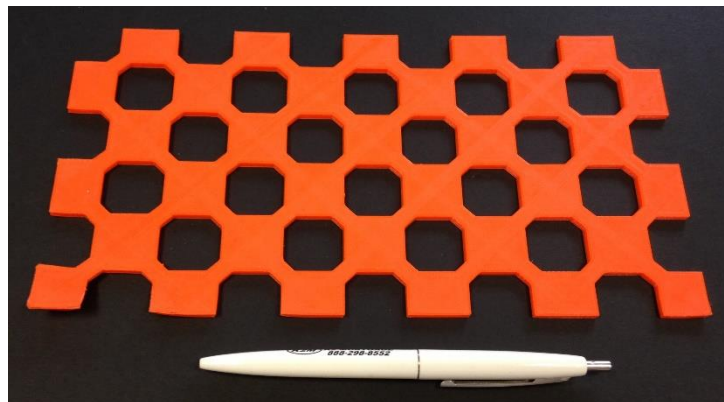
Max size checkerboard part used to determine if build profile parameters were optimized for part removal
